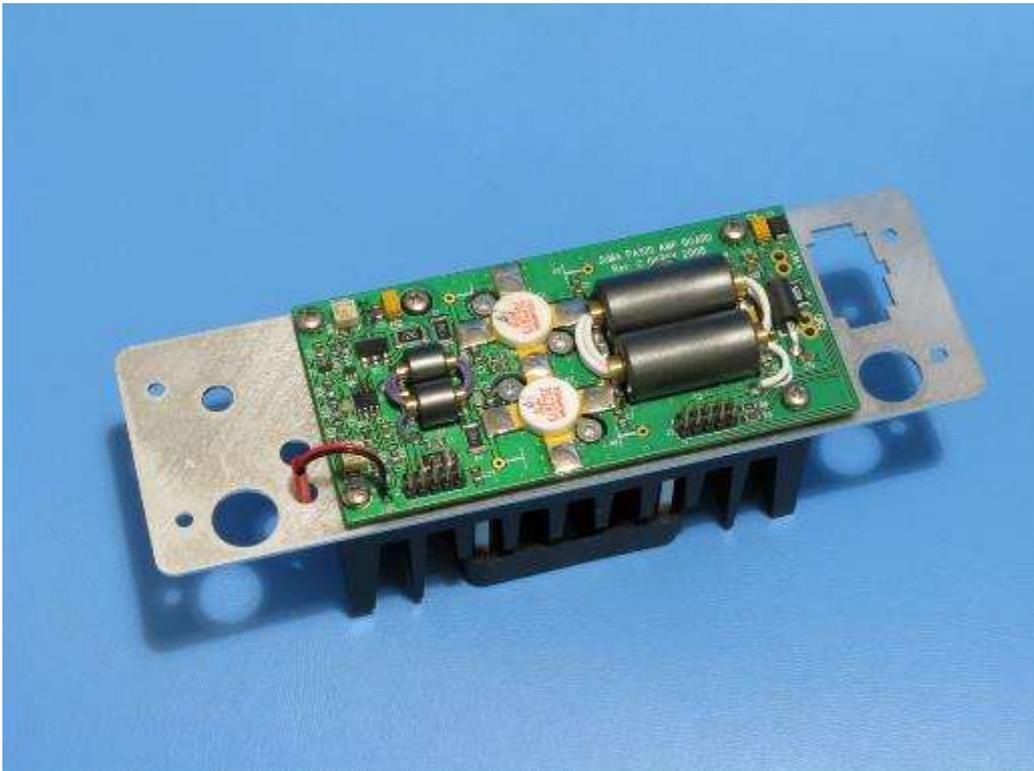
Tighten alternately all the screws and solder Q1 and Q2 legs. Use large soldering tip iron
